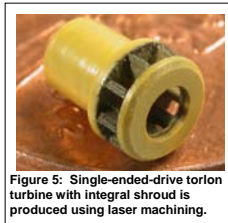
Single-ended-drive rotor turbine with integral shroud blades produced using laser machining.
